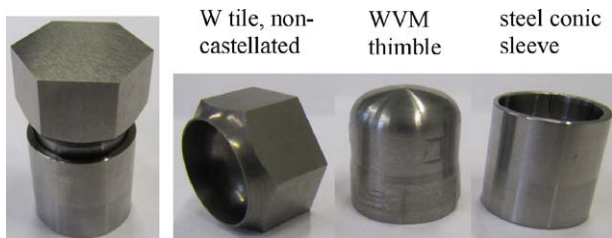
1-finger module components 2010 (W tile, WVM thimble, and steel conical sleeve) manufactured at KIT.
